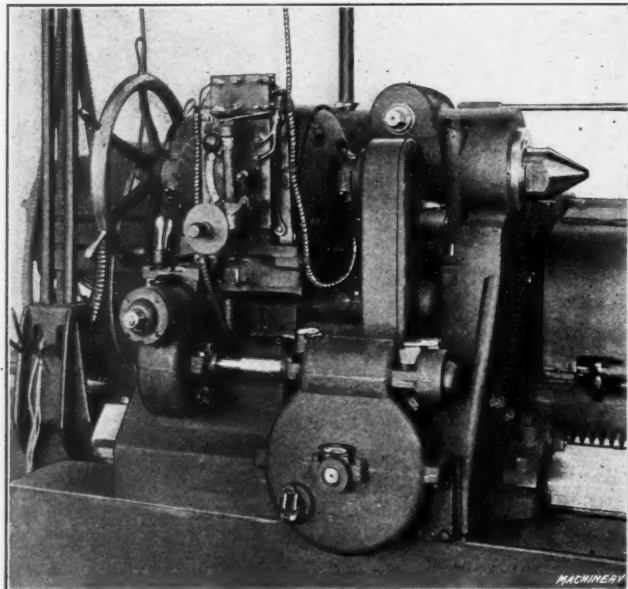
Detail of Footstock of Norton Roll Grinding Machine
